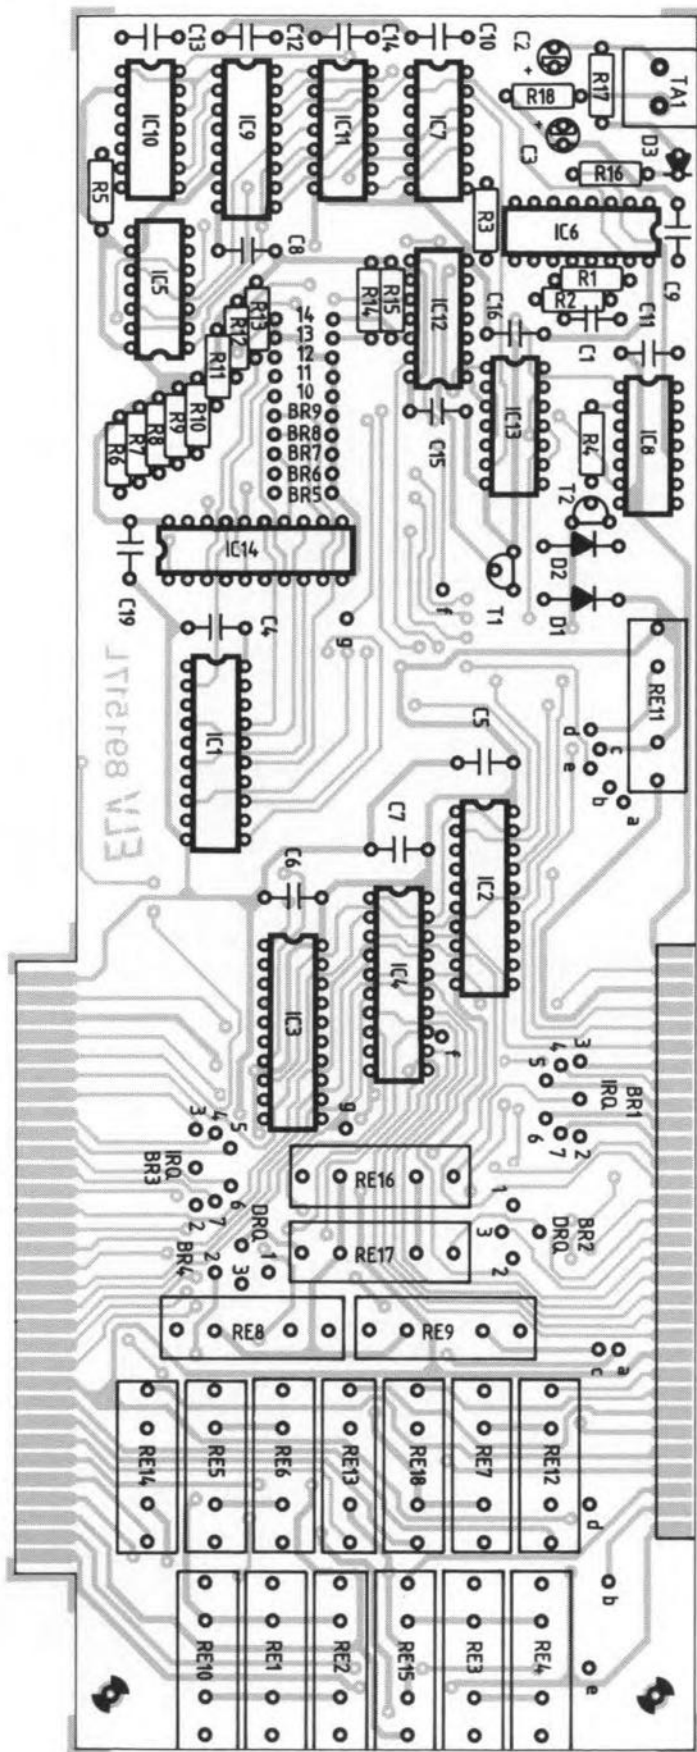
Component overlay on the double-sided through-plated printed-circuit board.
